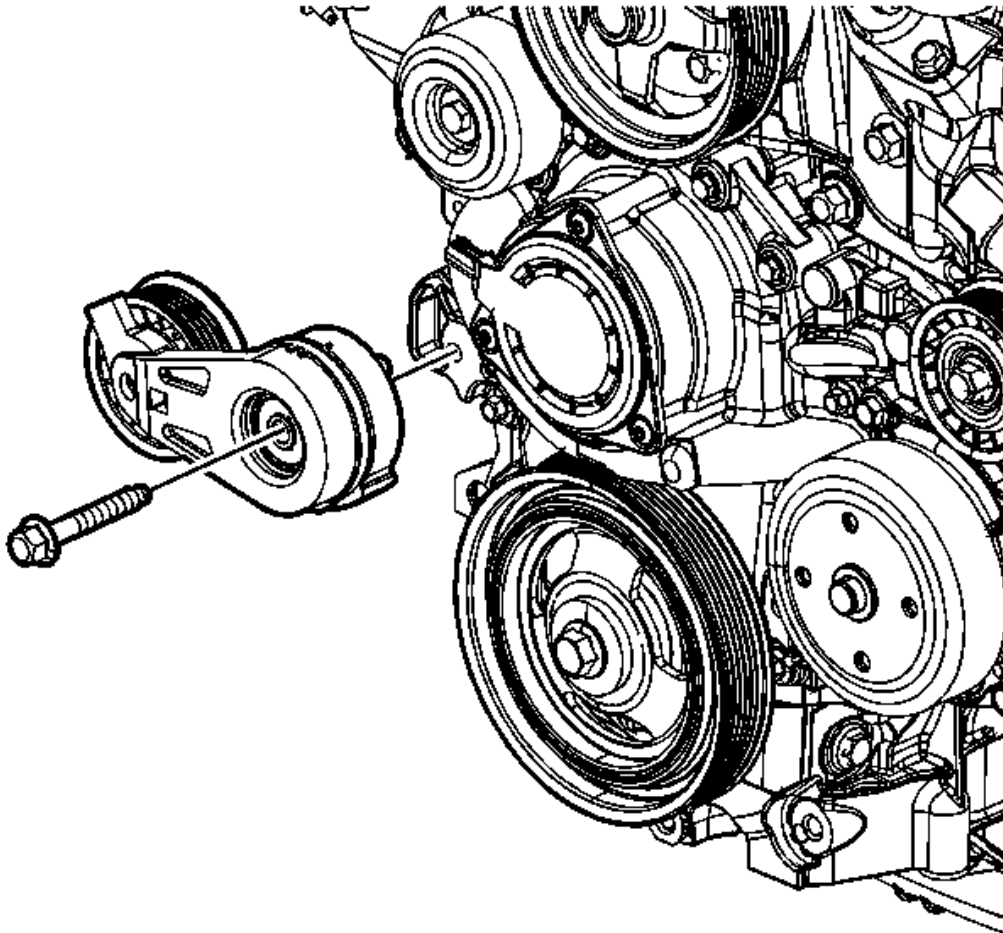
Identifying Drive Belt Tensioner & Bolt
